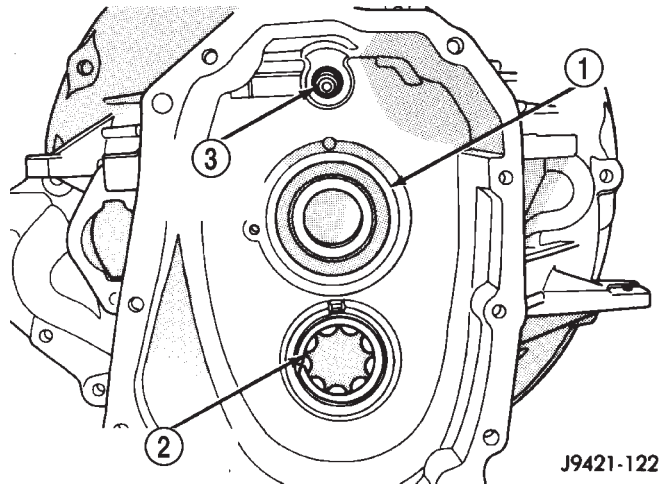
Input Shaft Bearing And Countershaft Front Bearing
